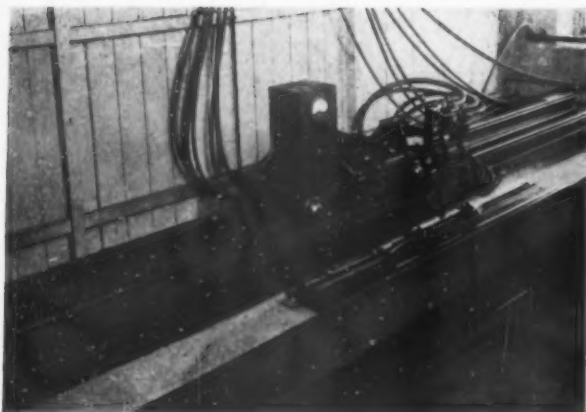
A new machine for surface hardening long straight-line surfaces.
